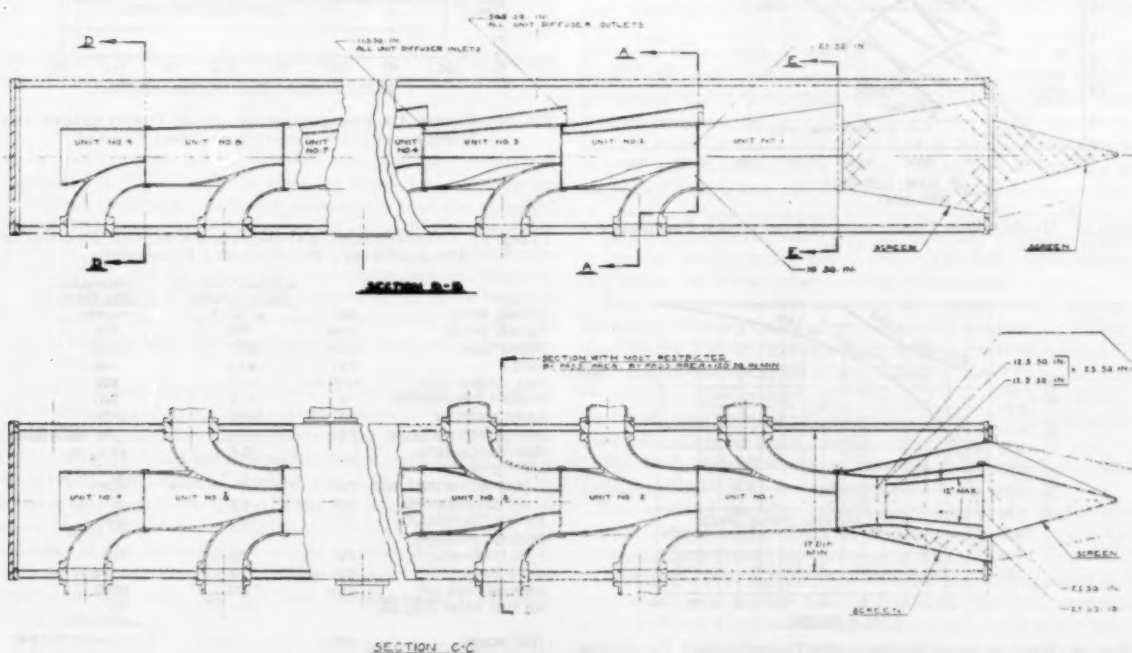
DRAWING OF MODEL 498 TURBOCHARGED-ENGINE MANIFOLD
